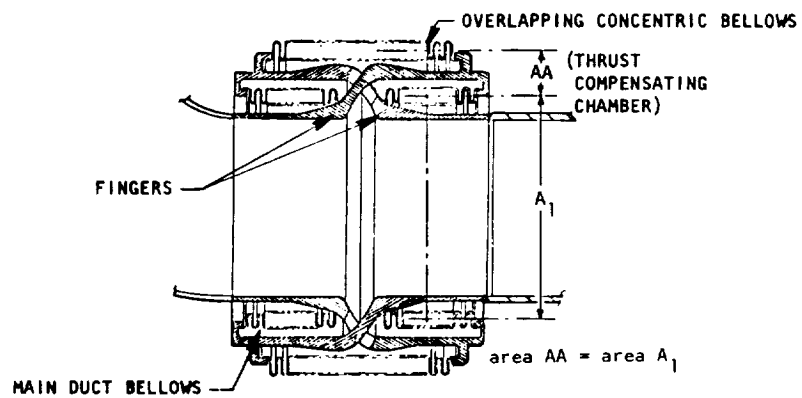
Finger-compensator joint with thrust-compensating chamber.
